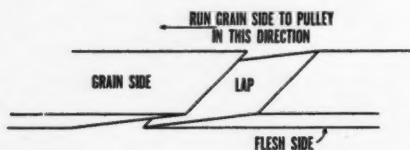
To Splice Single-Ply Belting, Bevel the Contacting Ends As Shown, Roughen the Surfaces, and Glue
